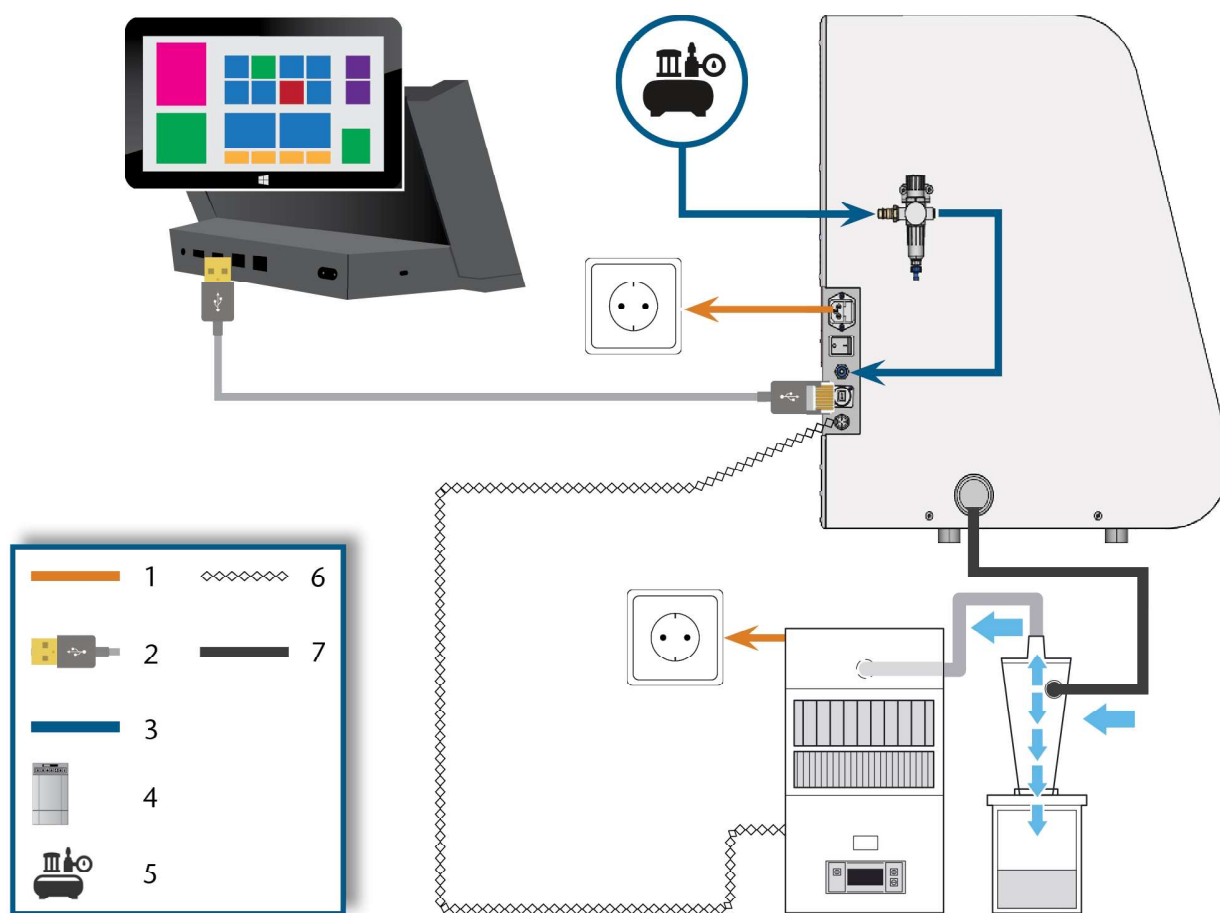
MACHINE INSTALLATION (SCHEMA)
